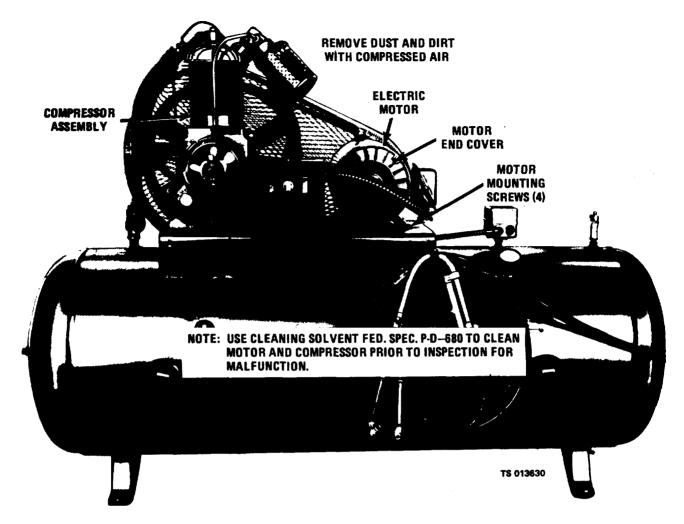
Electric motor compressor, cleaning, V-belt and installation.
